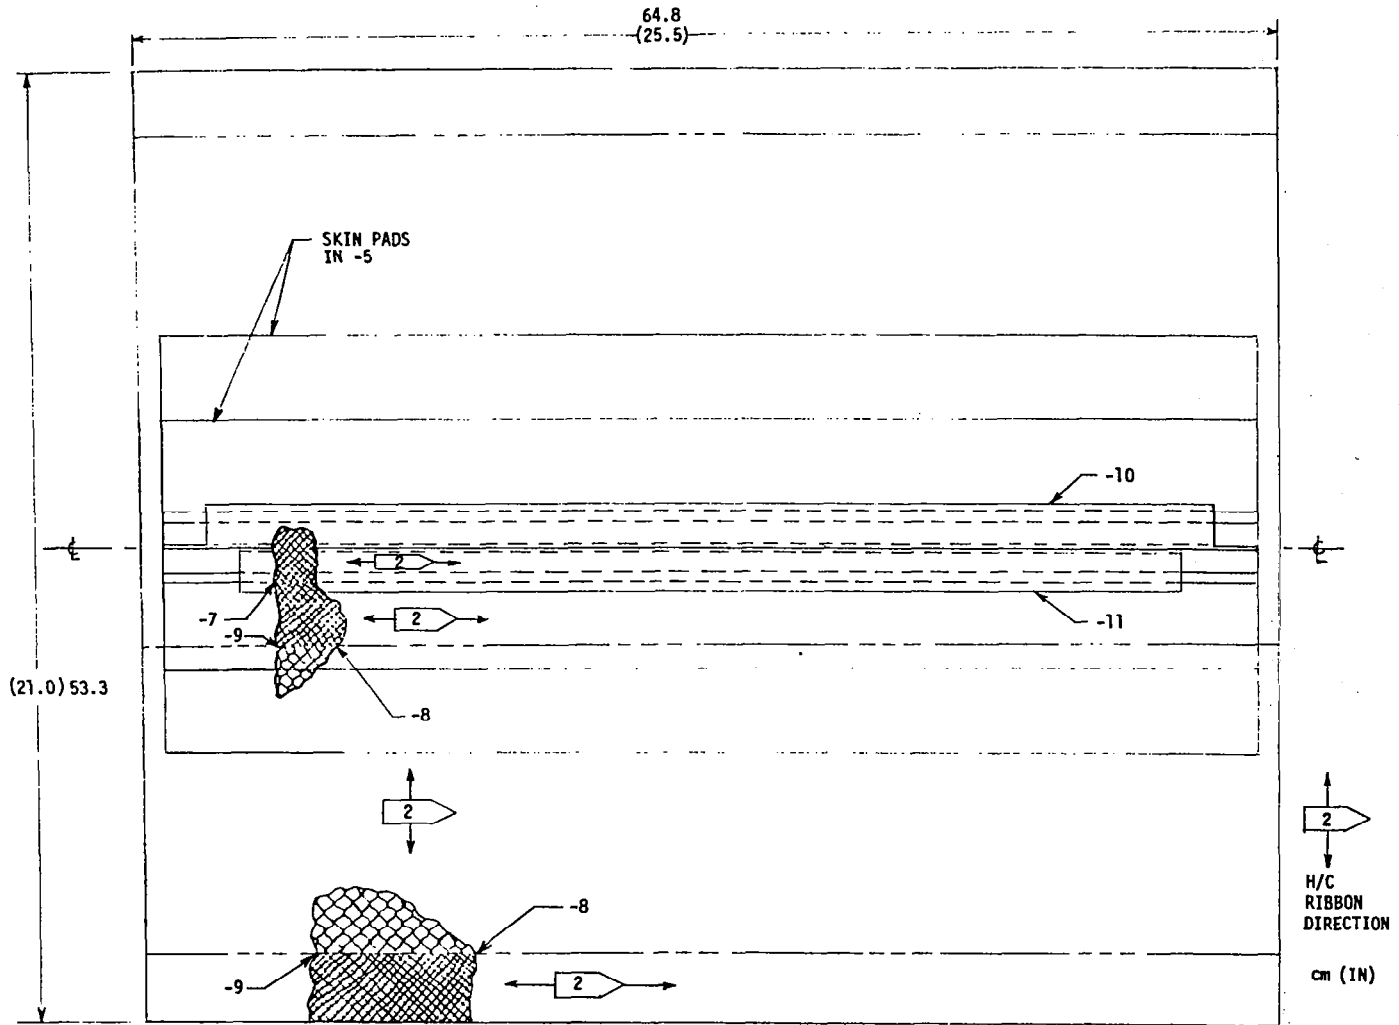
Figure I. Specimen I Inner Surfaces and Honeycomb Core Plan View
